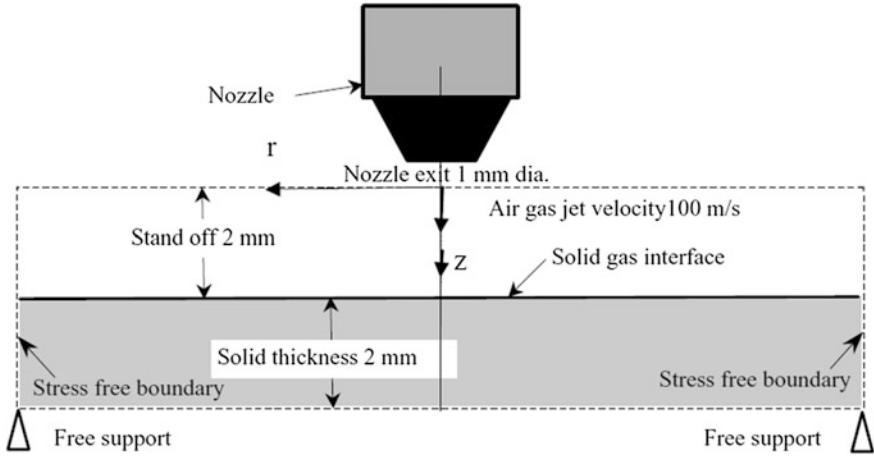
A view of impinging gas and laser workpiece arrangement [13]
